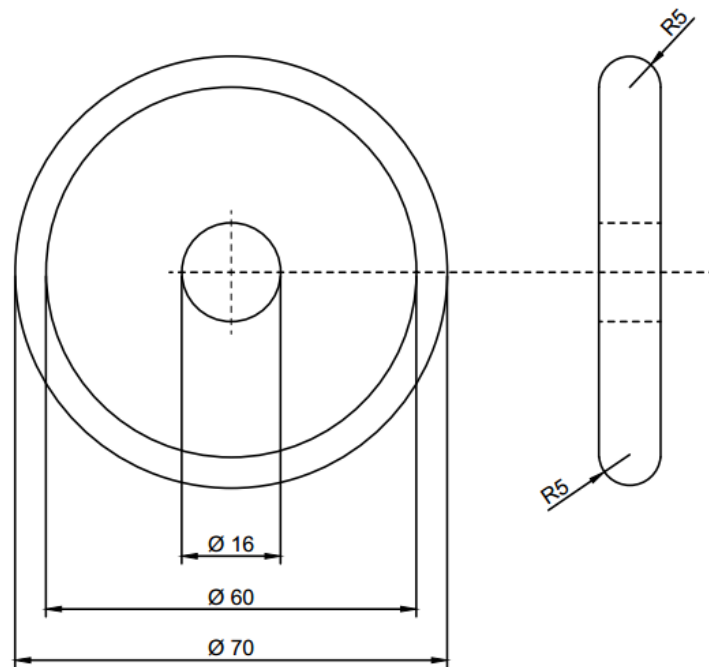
Specimen size of WC/Co wheel for rolling-sliding tests
